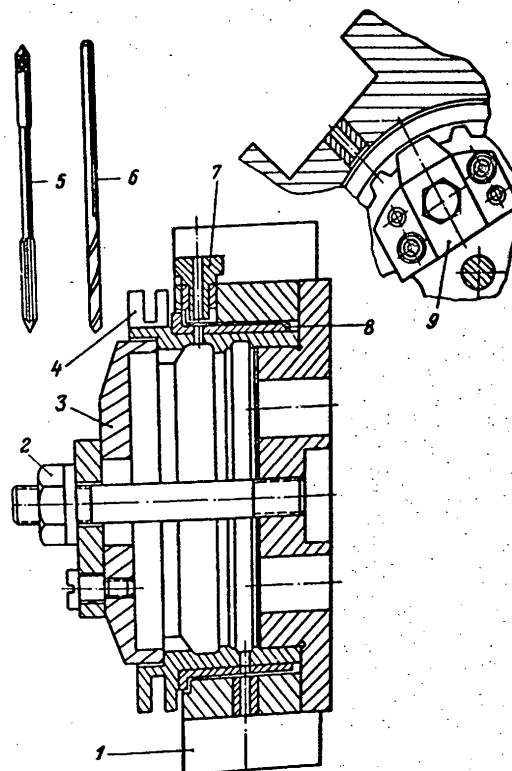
DRILLING AND REAMING HOLE IN SECOND
